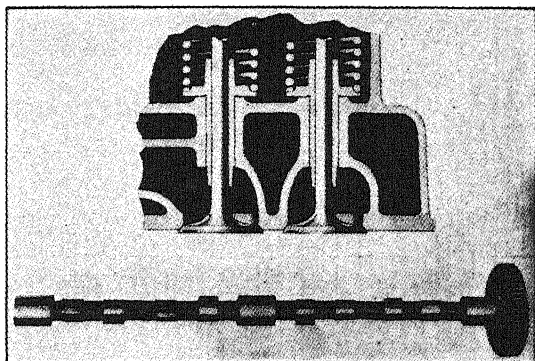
Upper—Valves, valve guides, and valve springs. Lower—Camshaft and camshaft gear.
